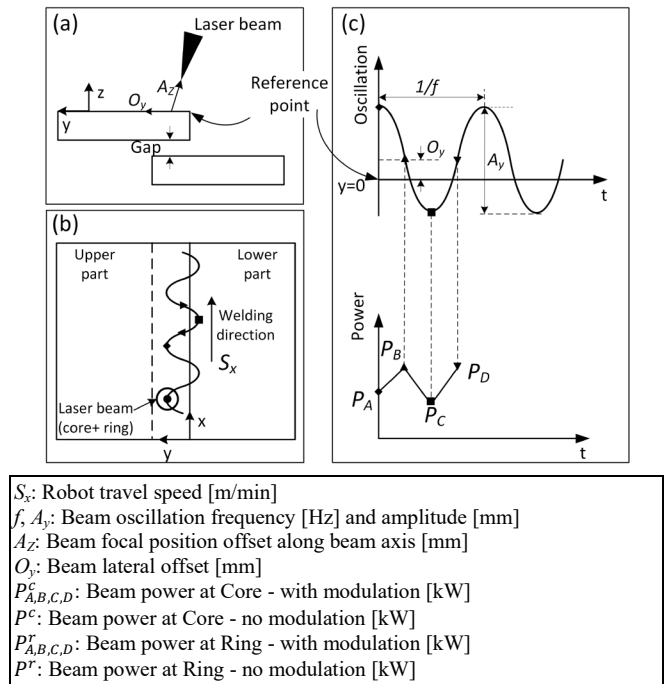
Illustration of key welding parameters; (a) cross view; (b) top view and; (c) beam oscillation and power modulation [9].
